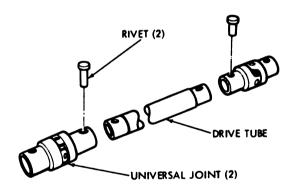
Manual traversing drive disassembly or assembly (3 of 4).
